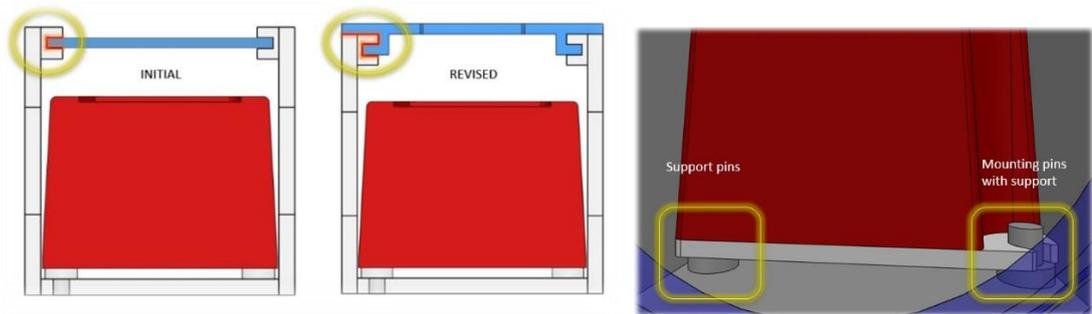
Driver module housing with mounting lid re-design (left image), and driver support and mounting pins (right image).
